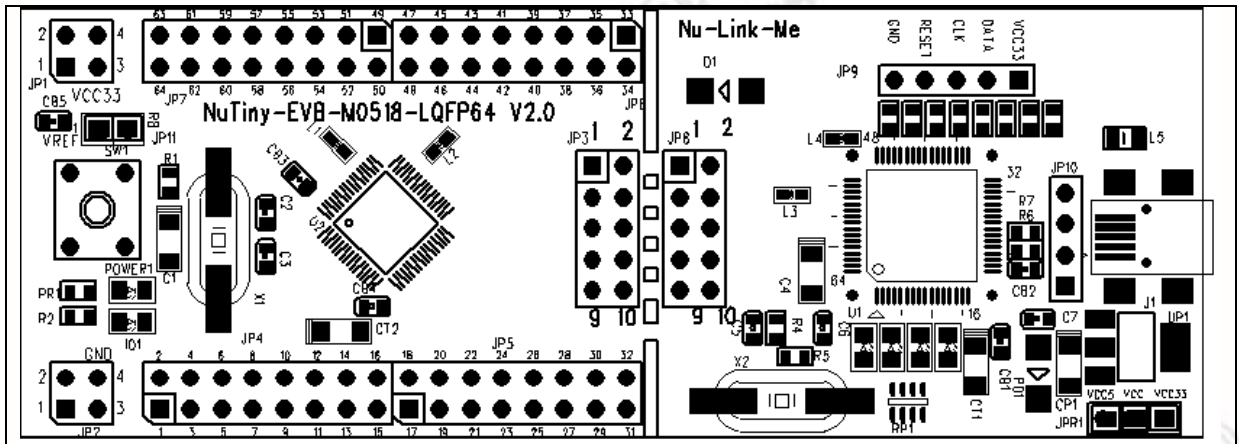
NuTiny-SDK- M0518SD2AE PCB Placement
